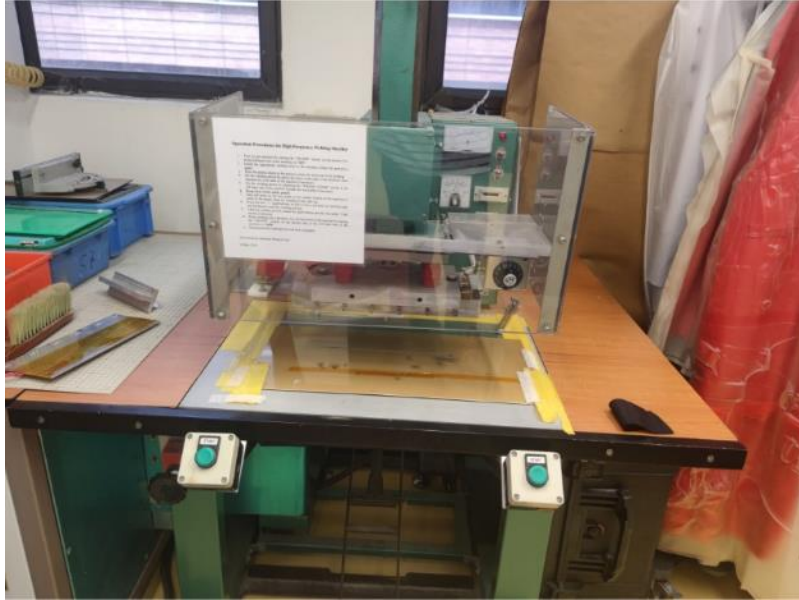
SANDEN KS_4000T welder for making network-structured devices. By ratio-frequency welding two pieces composite fabrics of polyamide fabric laminated with a thermoplastic polyurethane film in an aluminum mold.
